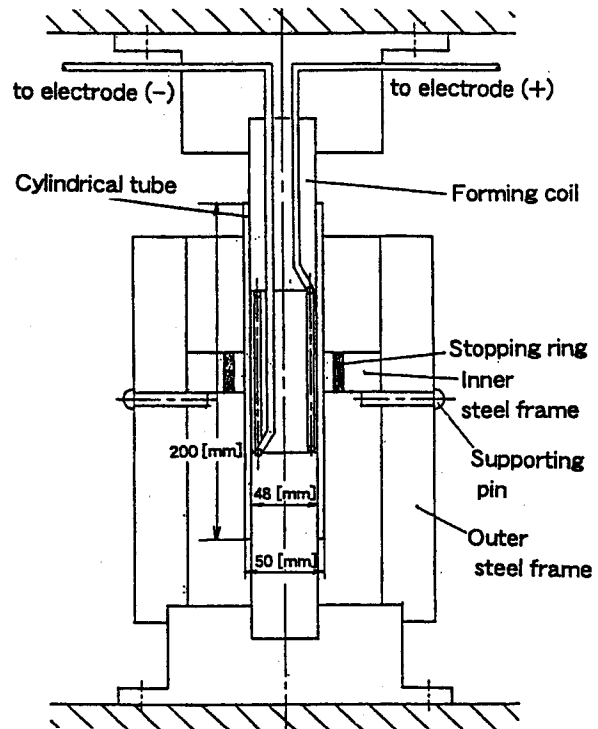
View of forming coil, cylindrical tube and stopping ring with steel frames.
